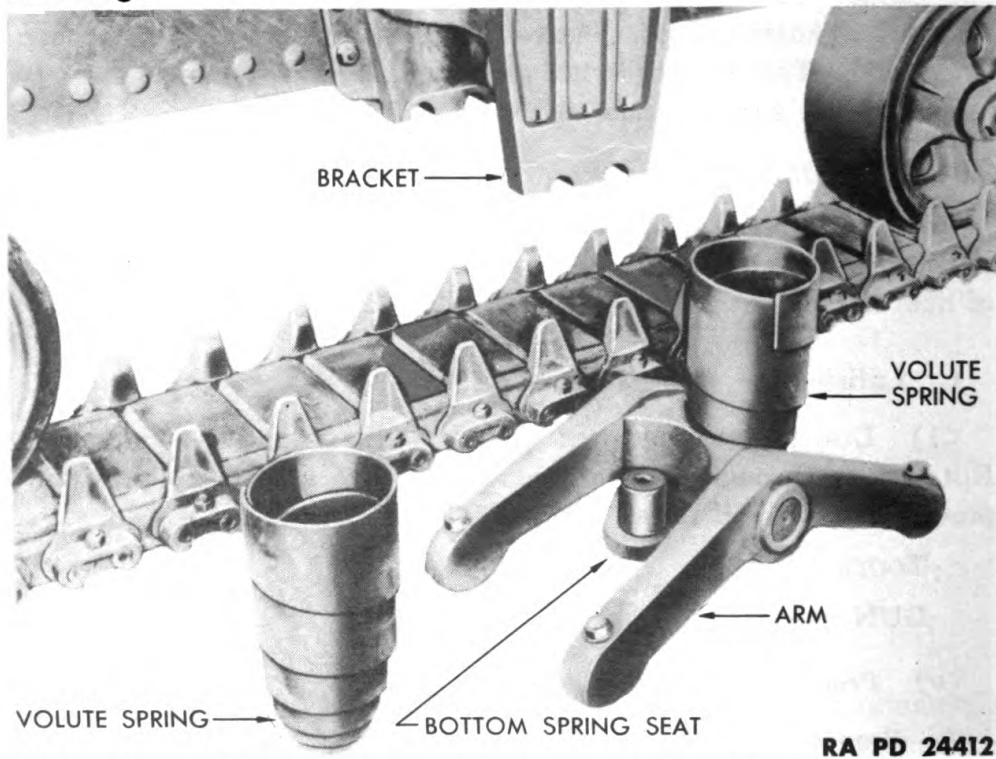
Volute Springs, Levers, and Bottom Seat Removed and Partially Disassembled
